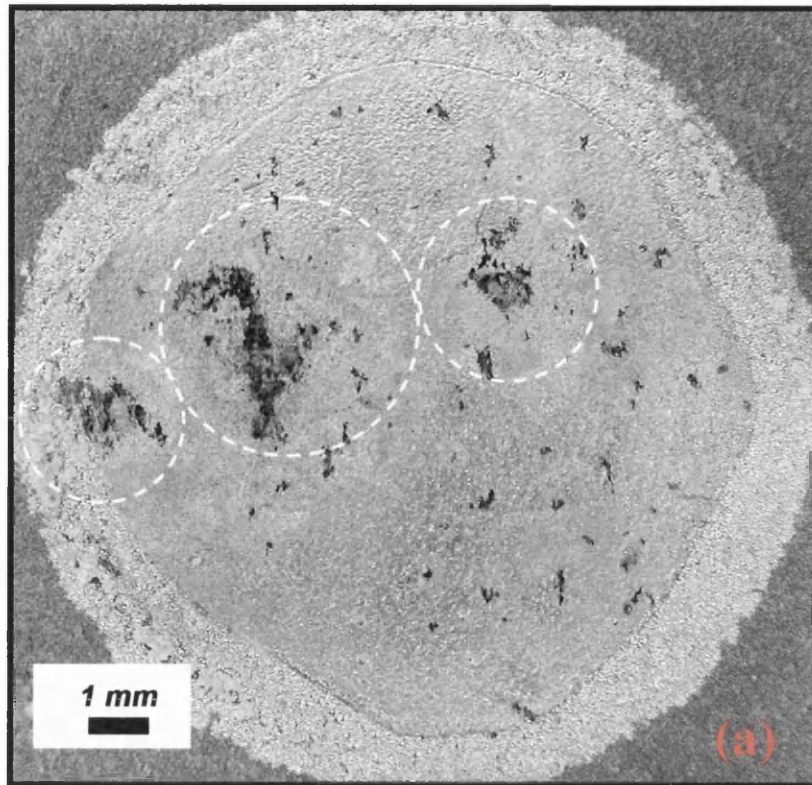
Fracture surface from specimen PC-4, used to define final crack profile measurements A1 – A5.
